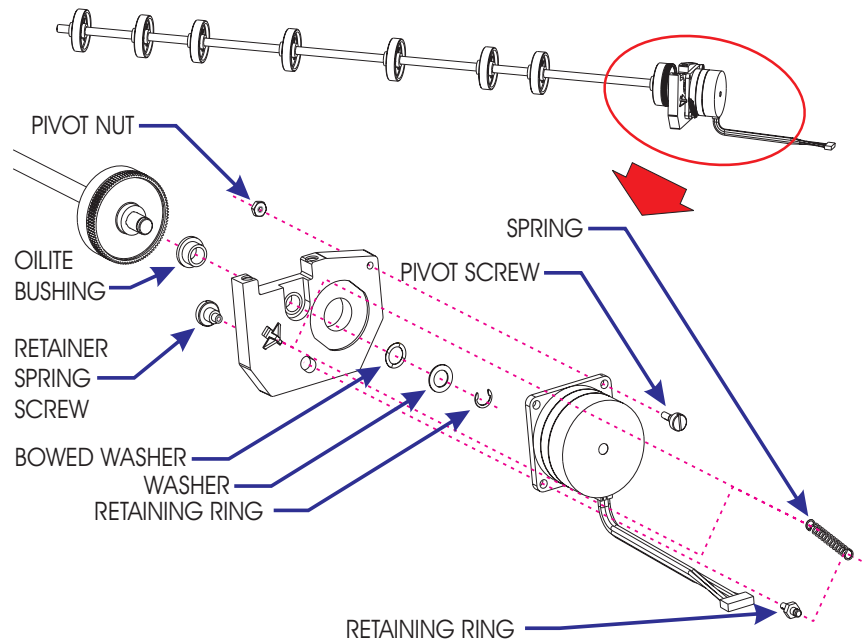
Lower Drive Assembly and Stepper Motor Assembly.
